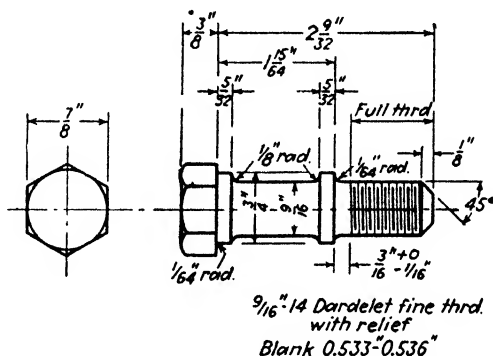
Special-headed bolt in which the necked portion is turned. Steel used is S.A.E. 1035.
